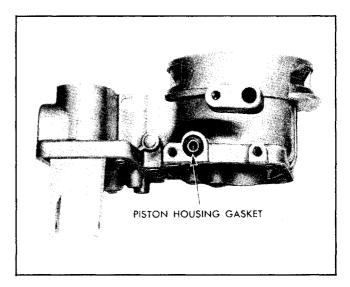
B-20 Choke Piston Housing Gasket—Carter
